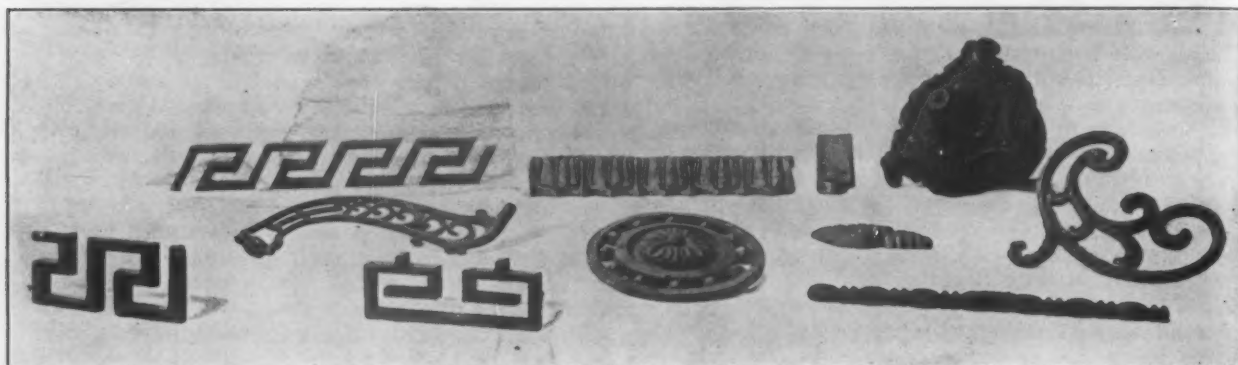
Ornamental Gray Iron Castings Made in Permanent Molds.
